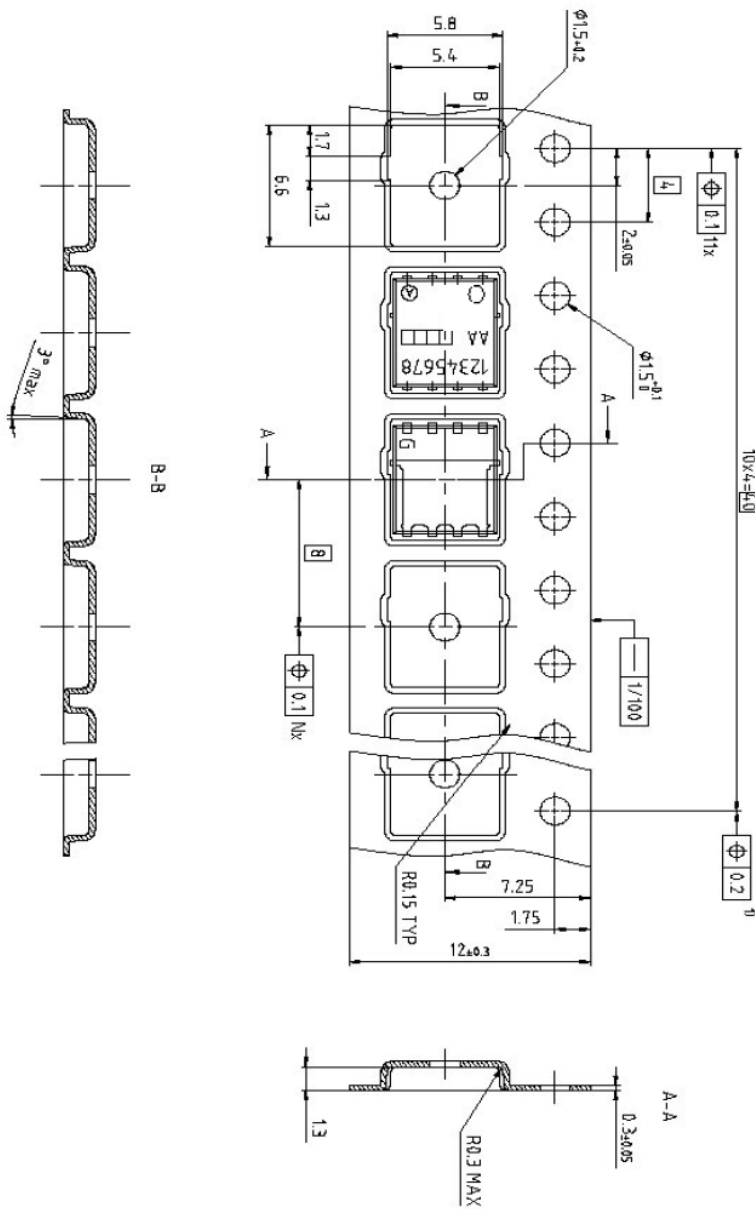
Outline Tape (PG-TDSON-8), dimensions in mm
